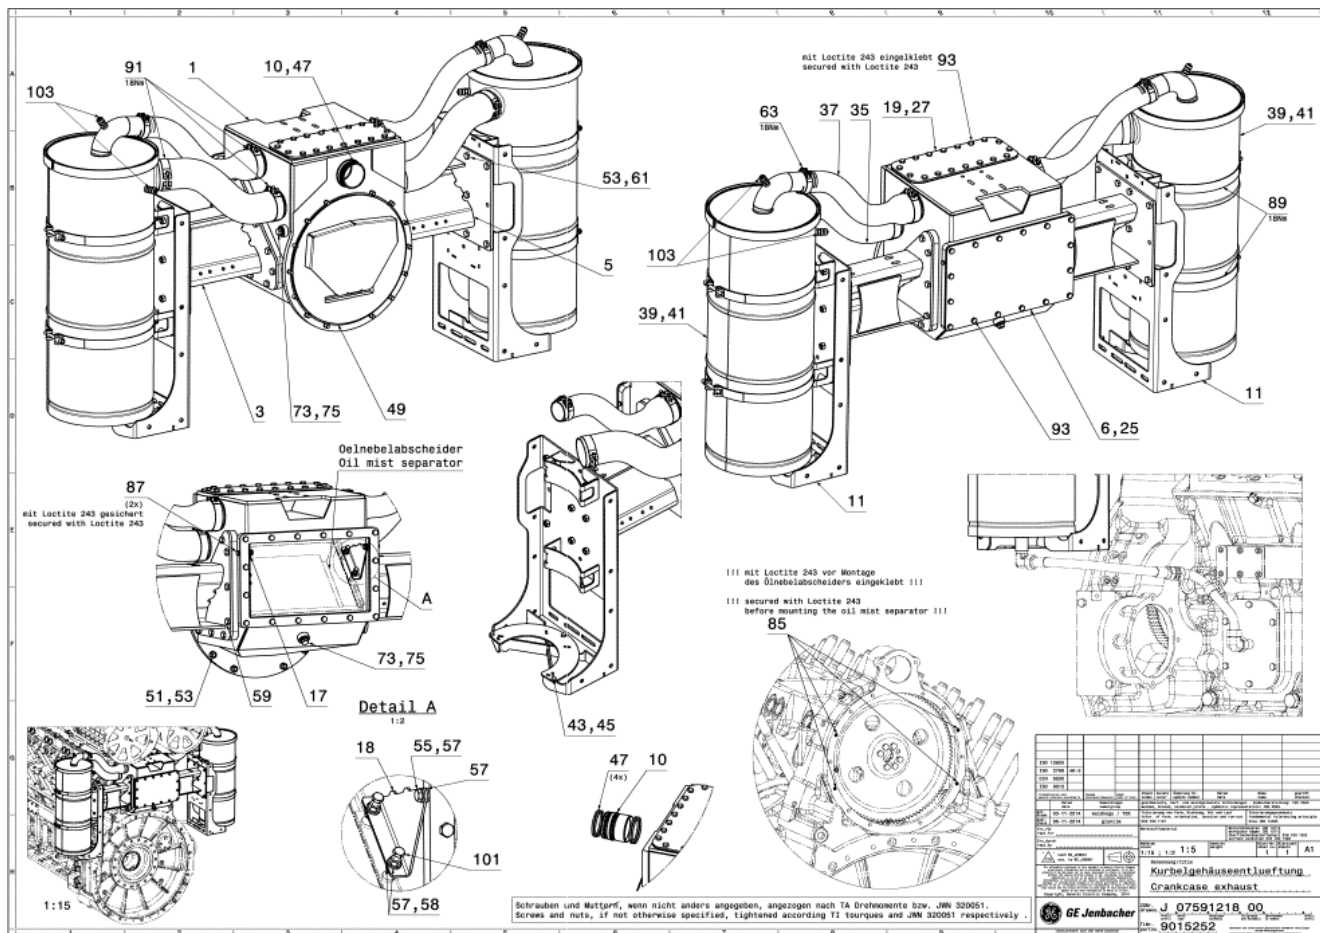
New plant crankcase ventilation assembly set, part no. 9015252
